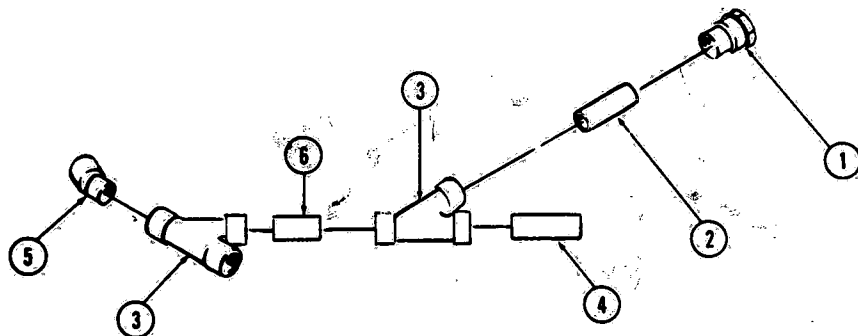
CONDENSER PIPING ASSEMBLY - Gravity
